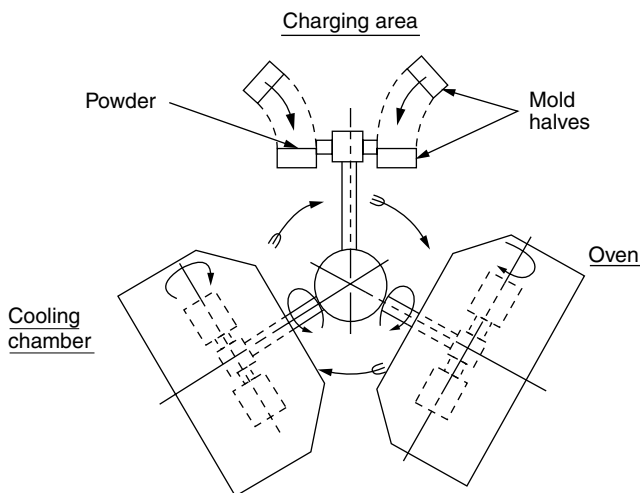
Basics of continuous-type three-arm rotational molding machine.
